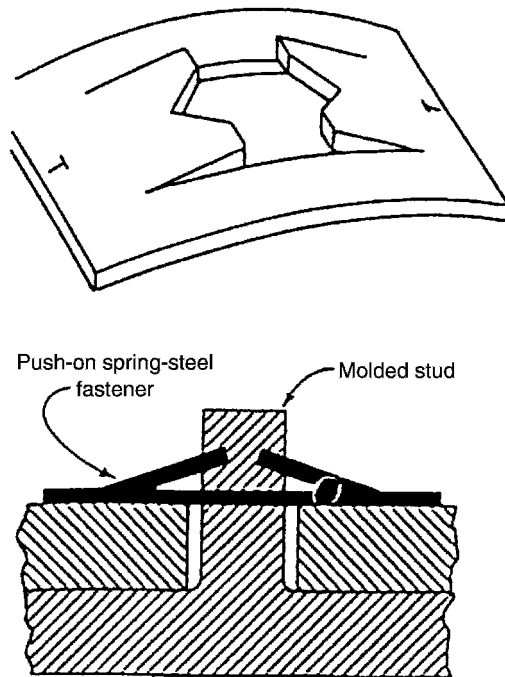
Typical spring fastener. (From Ref. 17.)
